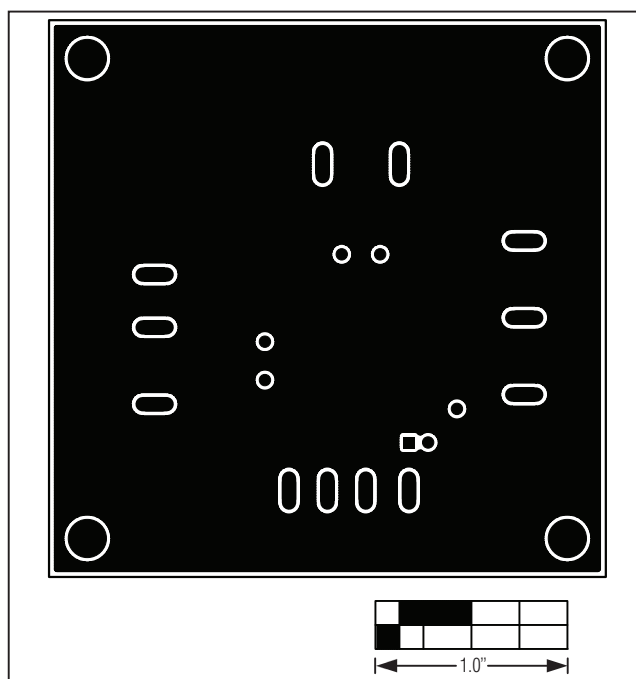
MAX17121 EV Kit PCB Layout—Solder Side
